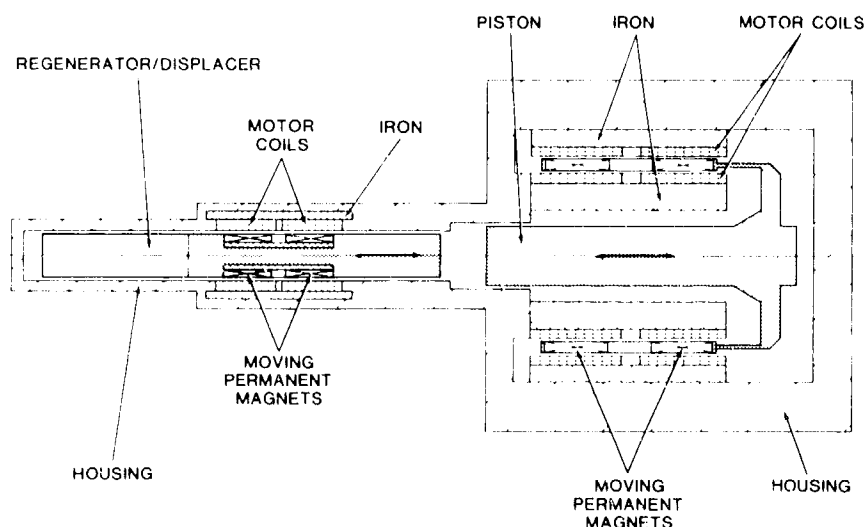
Cross-sectional view of linear drive showing displacer and piston motors.
